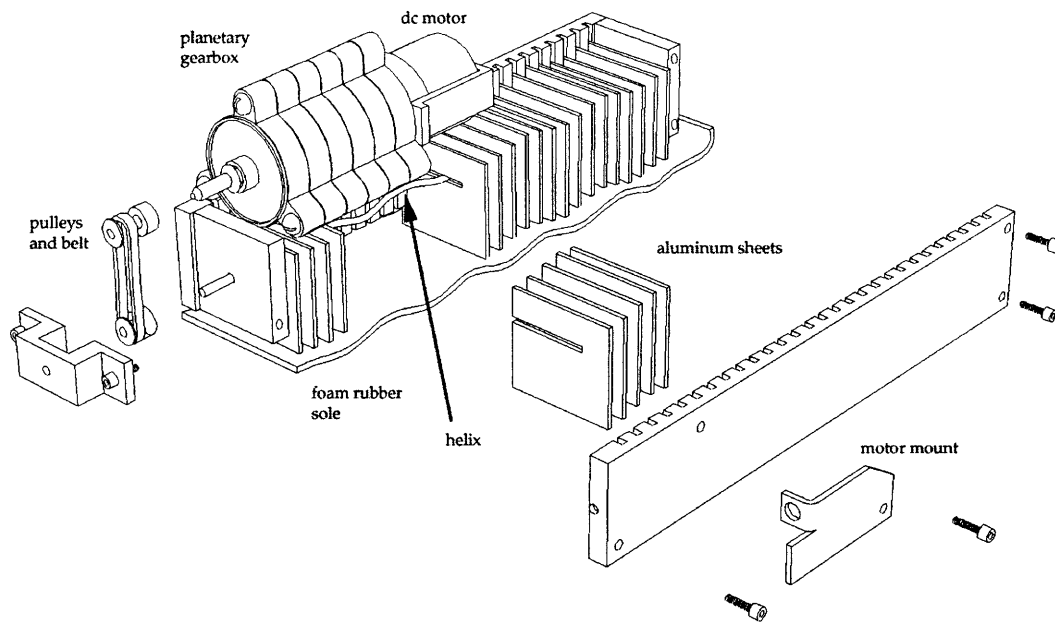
Partially exploded view of Robosnail 1 showing motor/gearbox assembly, rotating helix, slot plates, and membrane.
